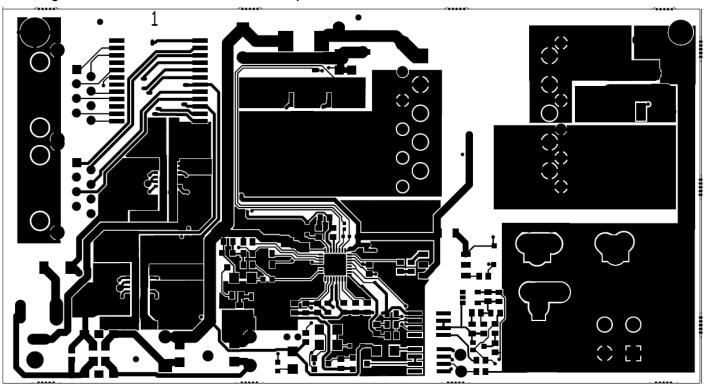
PD70201EVB60F12 EVB PCB Layer 2
